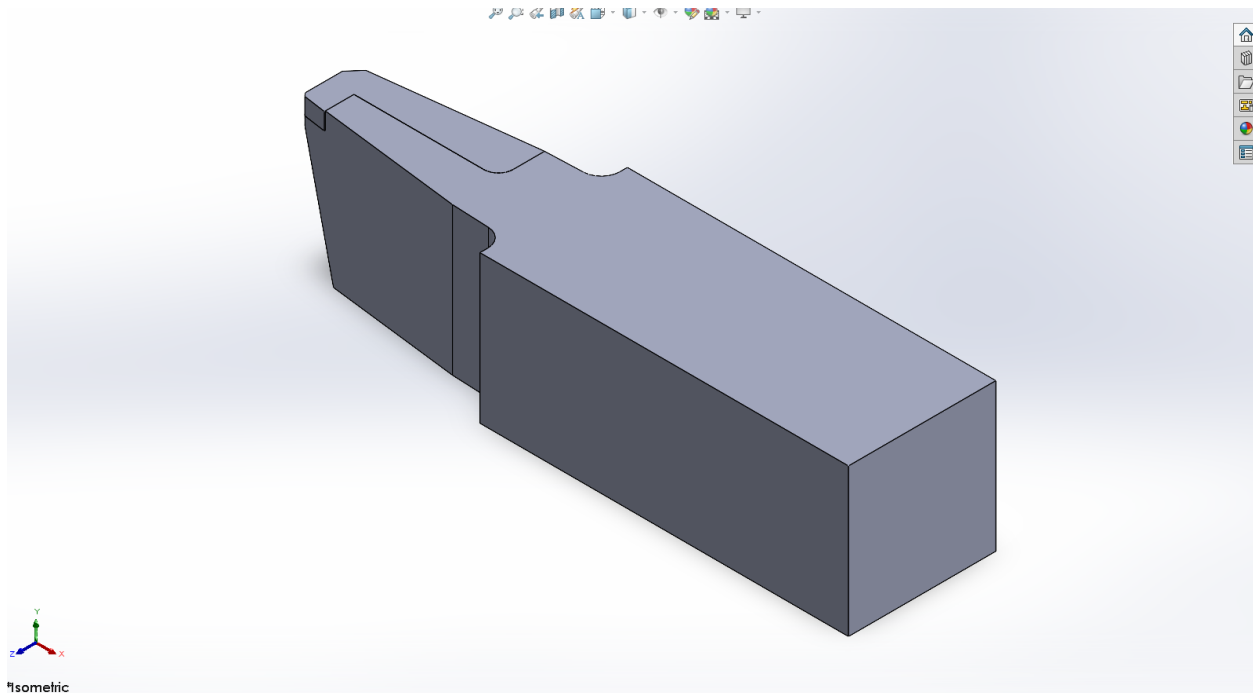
CAD Assembly of Profile tool holder and Cutting tool insert (RS)
